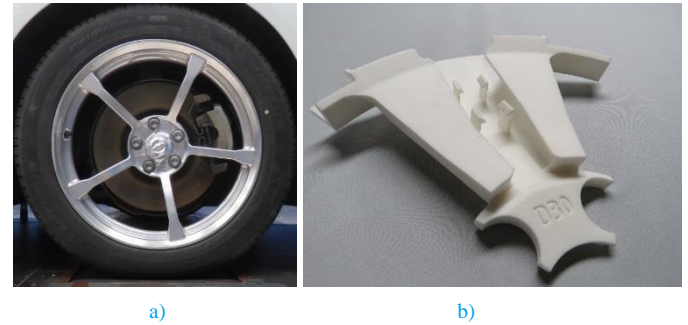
The modular wheel concept consisting of a) the base wheel and b) the 3D printed plastic inserts.
